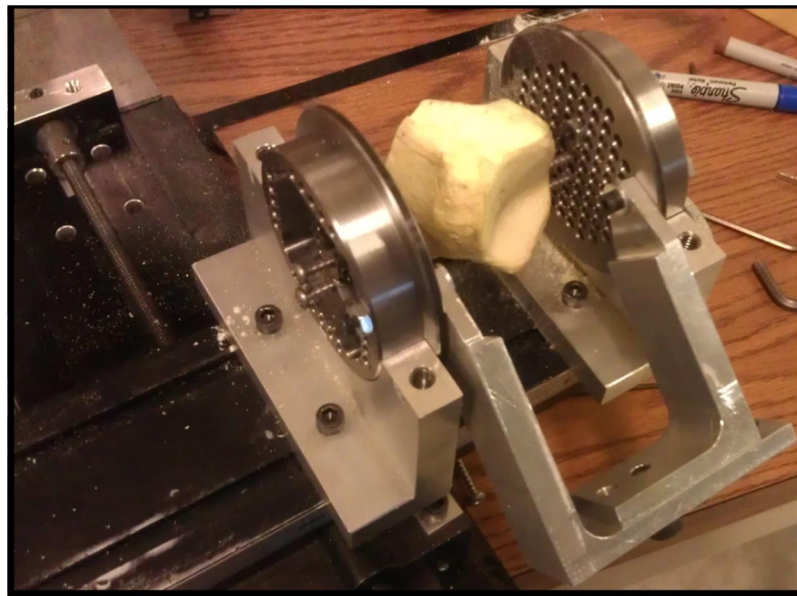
Support insertion from disc 2 and mounting of transfer handle
